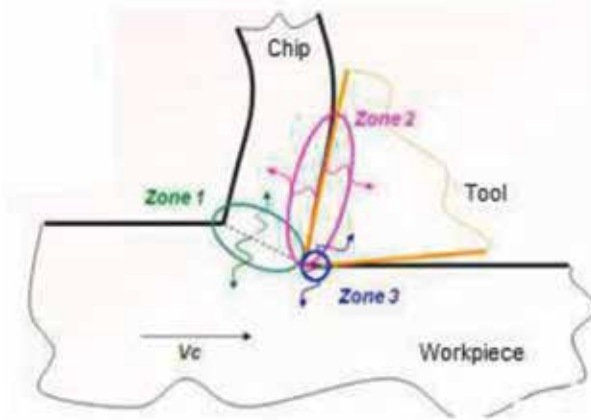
Orthogonal cutting zone. Zone 1 Primary shearing zone. Zone 2 Secondary shearing zone (interface friction tool/chip). Zone 3 Tertiary friction (interface tool/workpiece zone).
